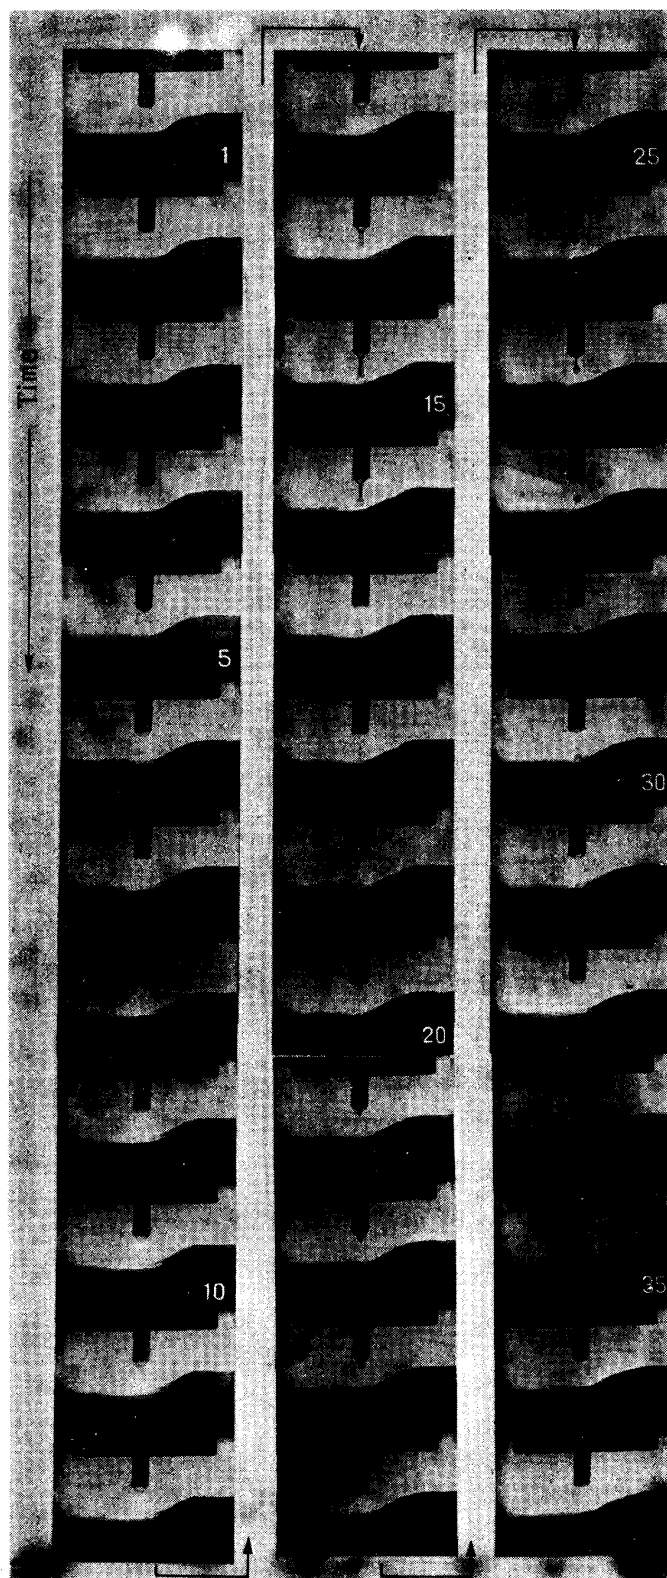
High speed motion picture of pulse arc welding.
